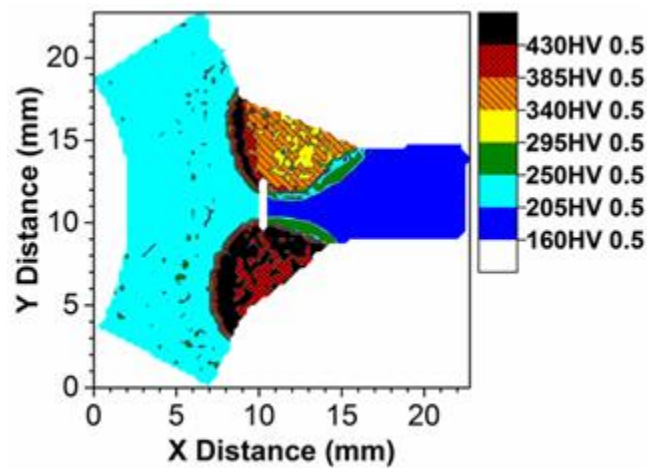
g As welded hardness map for T92-ferritic stainless edge bar welds
